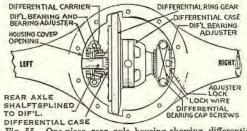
One-piece rear axle housing showing differential carrier integral with housing.
